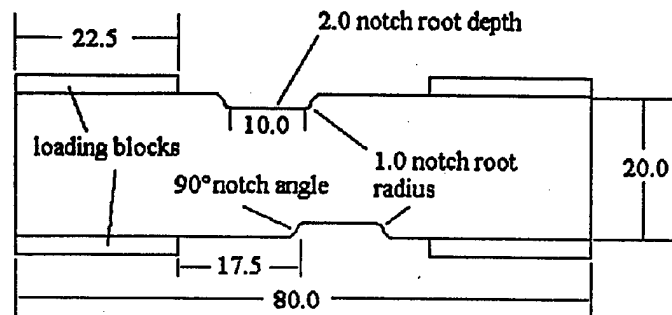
Optimized Iosipescu test specimen and loading block geometry (dimensions in mm).
